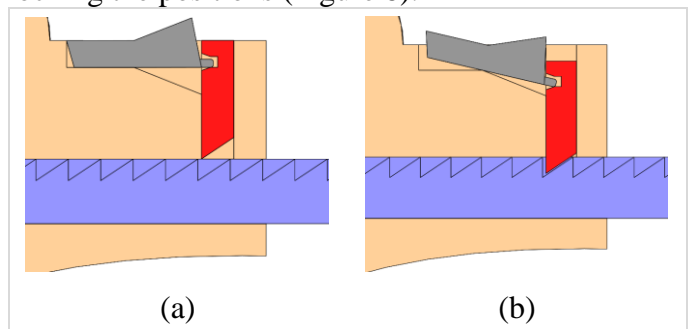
Button Locking Mechanism. a- Position: Open; b- Position: Locked
